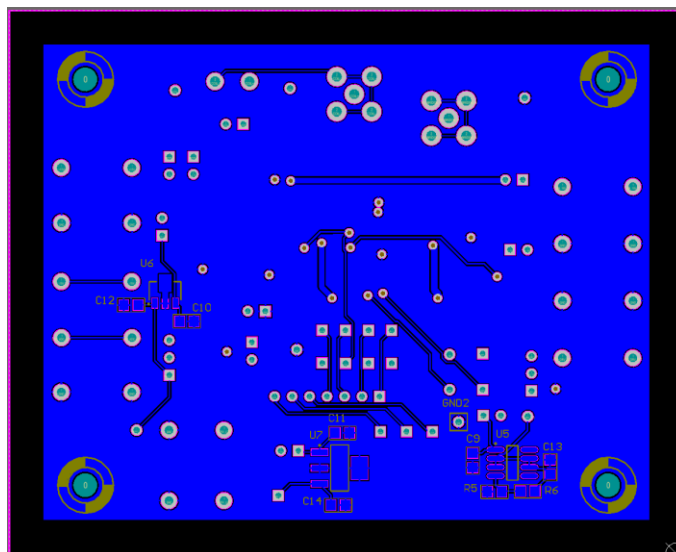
Transmitter PCB Board Layout (bottom layer)
